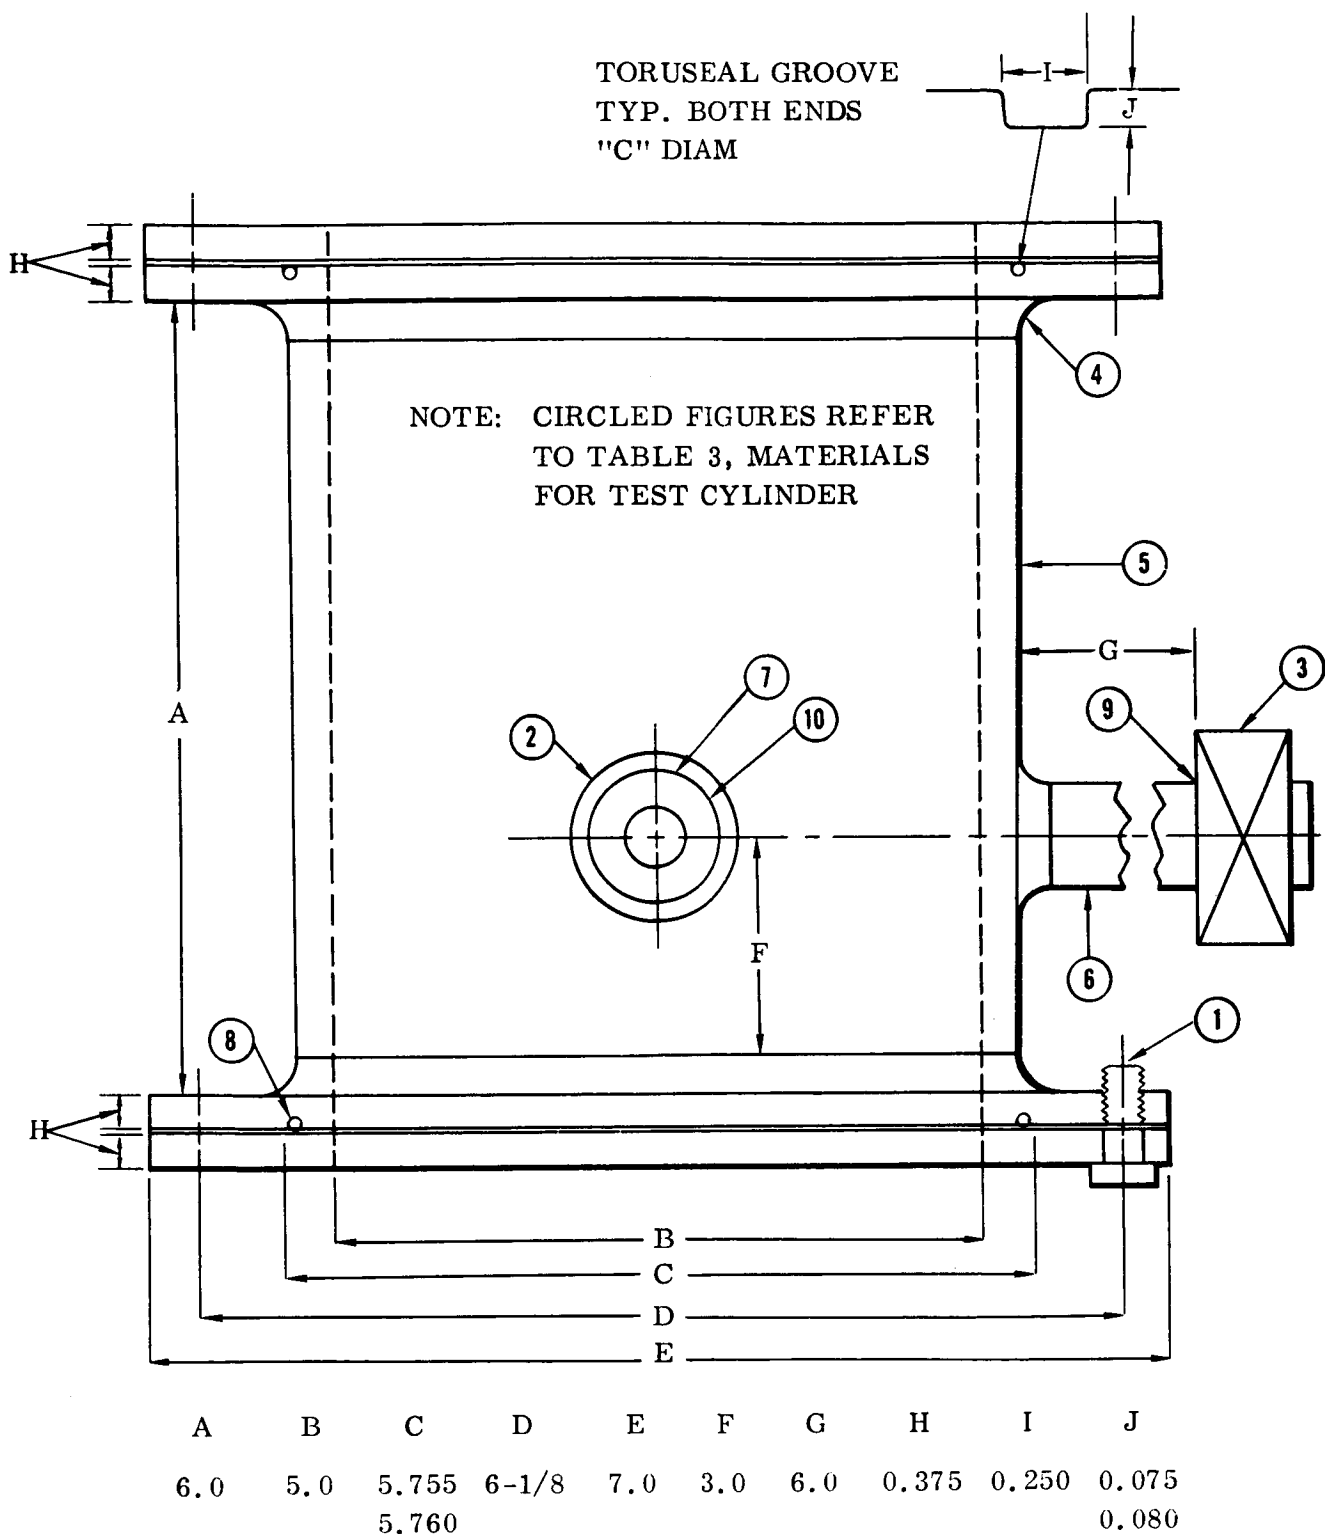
Construction Details of the Test Cylinder [Ref 2]
